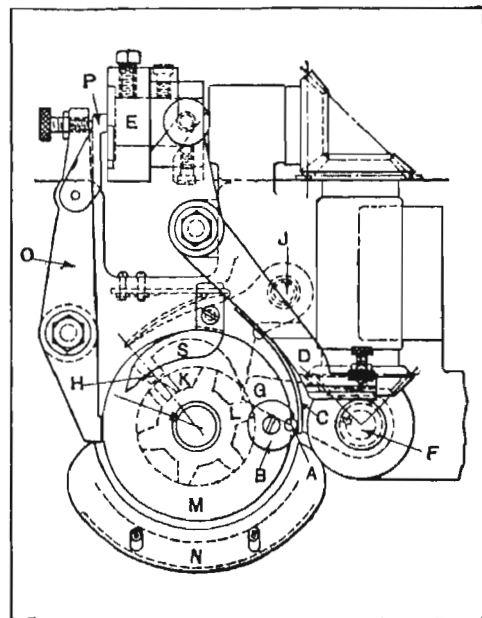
Automatic Indexing Mechanism of a Screw-slottting Machine
